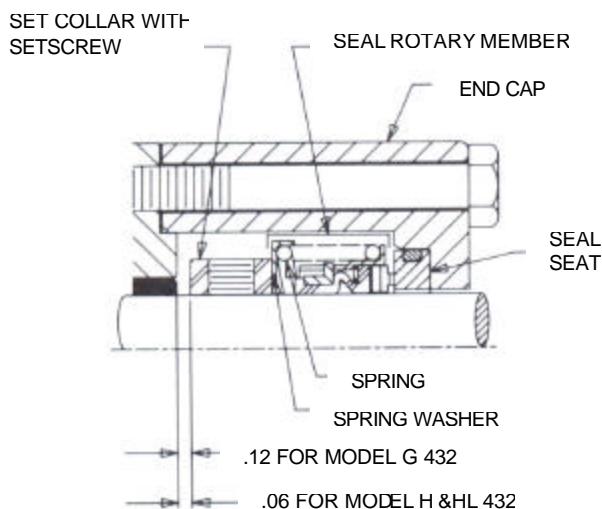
SECTIONAL VIEW, SEAL AREA
